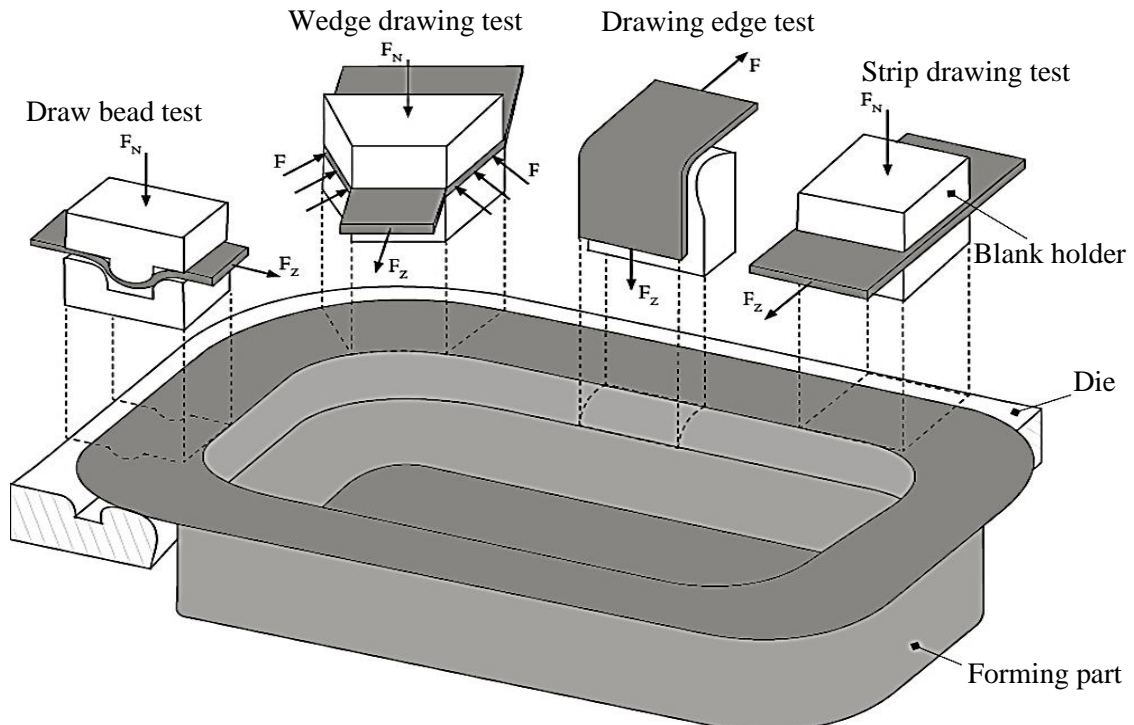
The test variants of the strip drawing test (Hoffmann et al. 2012)
